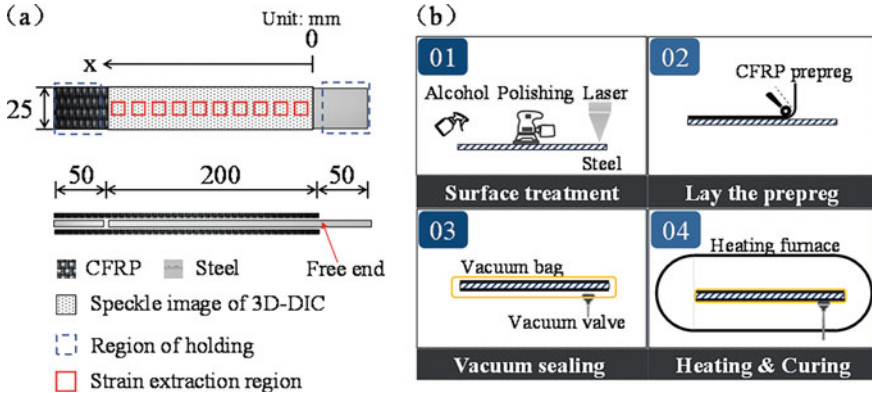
a Construction of the steel-CFRP double lap shear specimen; b vacuum bag pressure process for the steel-CFRP double lap shear specimens
